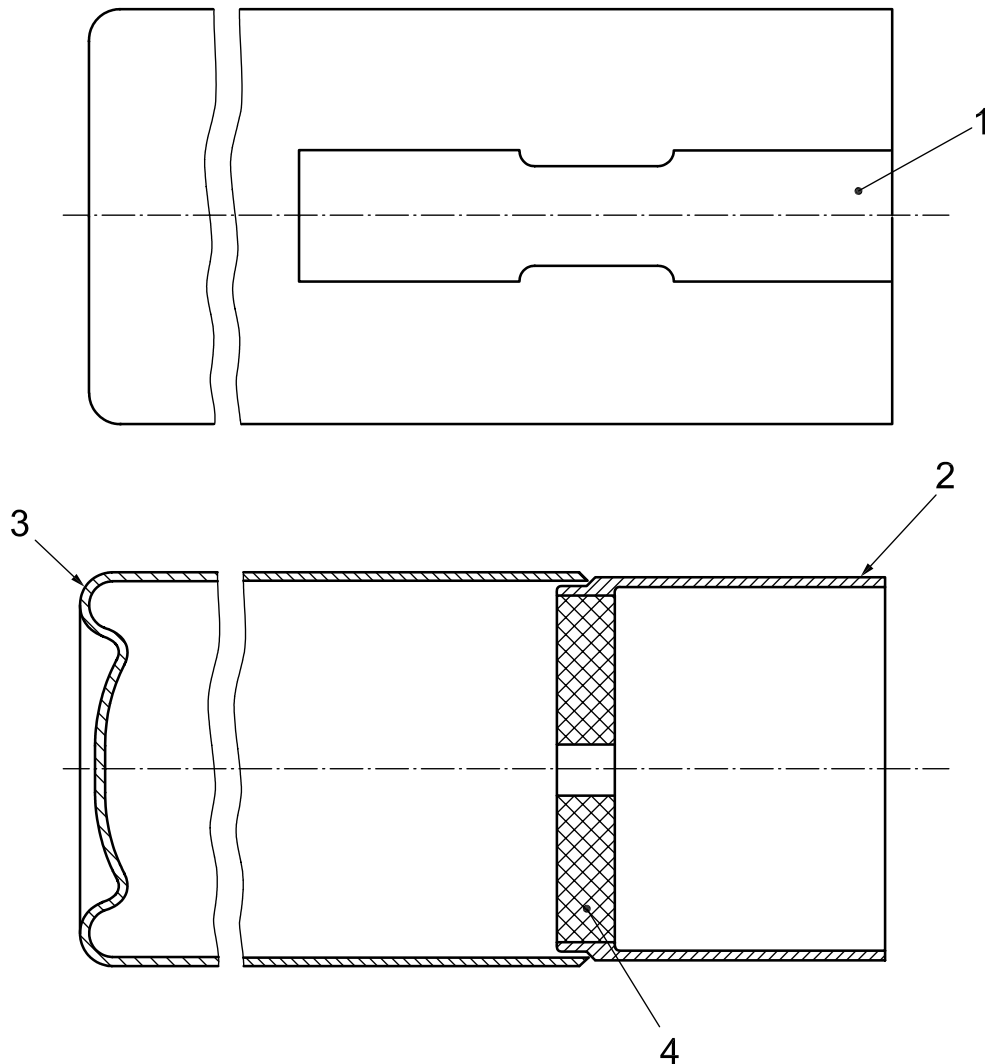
Test specimen for tensile test perpendicular to the weld
